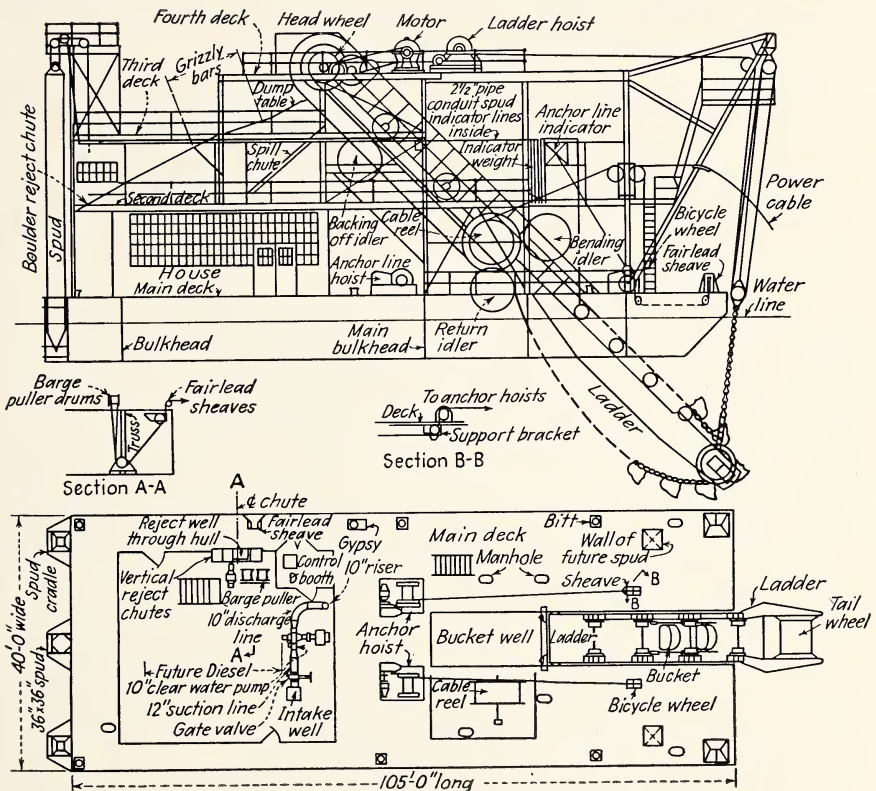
ELEVATION AND PLAN OF CONTINUOUS BUCKET LADDER DREDGE.
